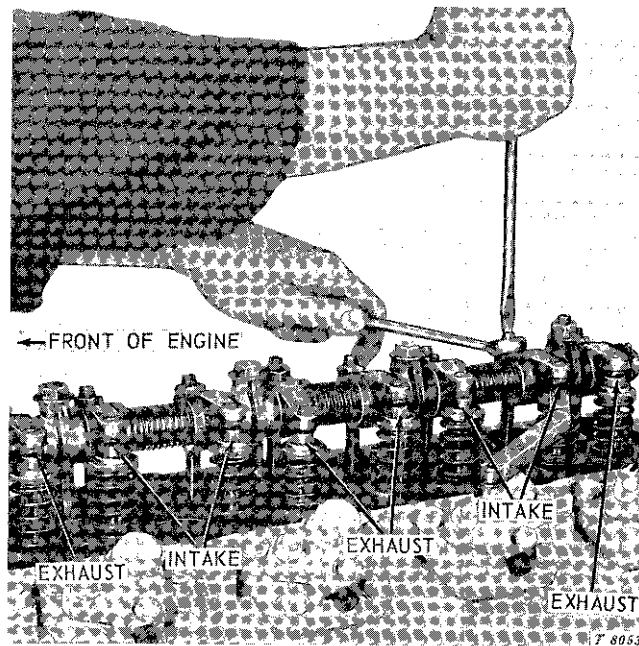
Adjusting Valve Tappet Clearance
